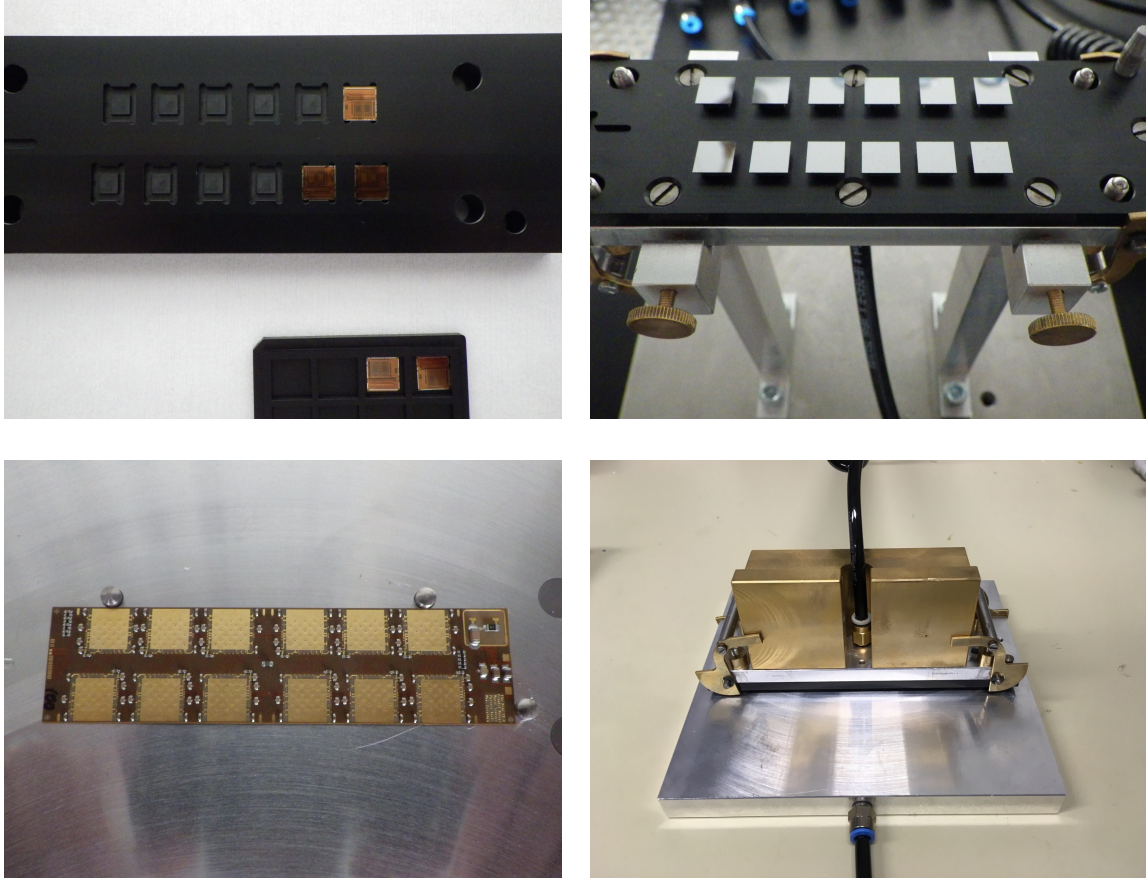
Chips in a partially filled chip tray (upper left), pick-up tool in a holder after picking up ASICs (upper right), upper hybrid before population with ASICs on a vacuum jig (lower left) and pick-up tool placing the ASICs onto a hybrid lying on a vacuum jig. The pictures are taken for hybrids of the split readout scheme.
